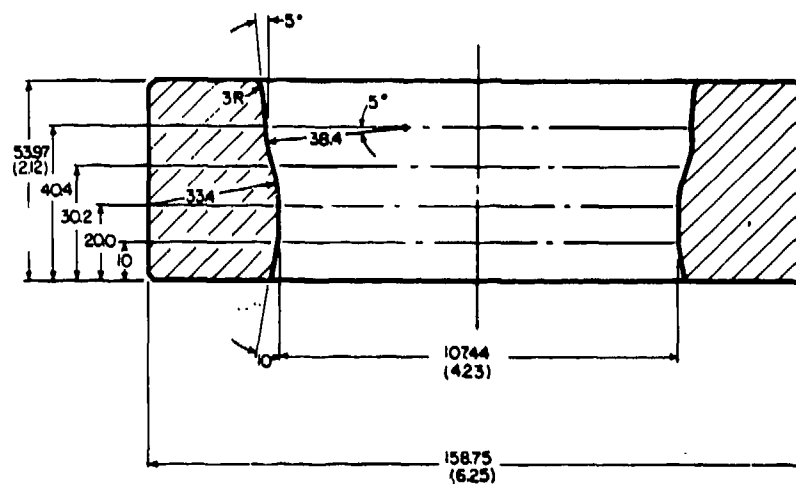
Tool assembly for cold drawing (final double draw) of M335 shell under production conditions.
